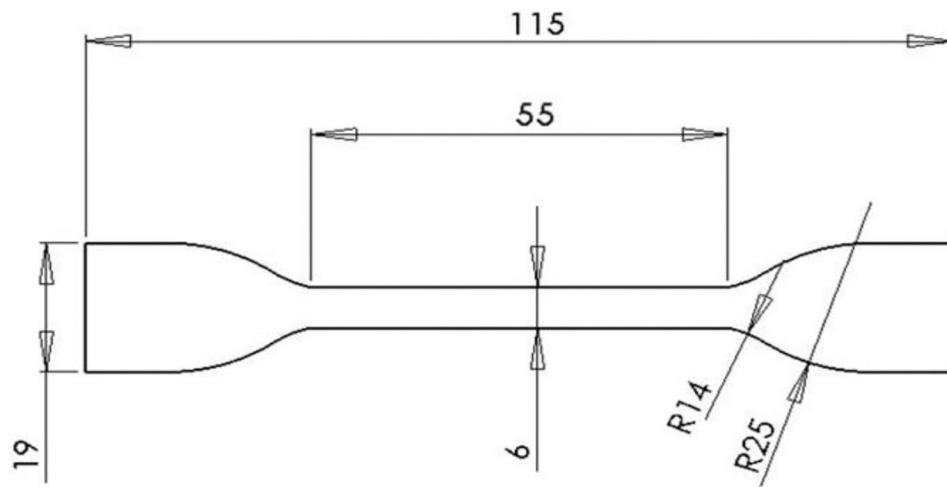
Schematic of dogbone specimen used for tensile testing, all dimensions in millimeters. Samples were approximately 3.2 mm thick.
